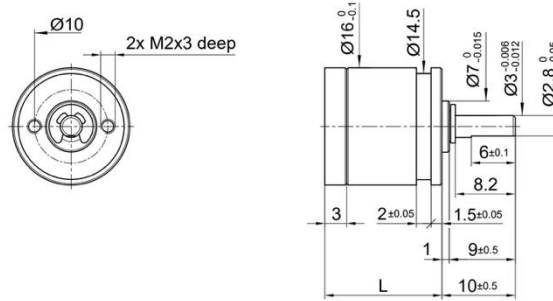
R16 SLEEVE BEARING GEARHEAD
